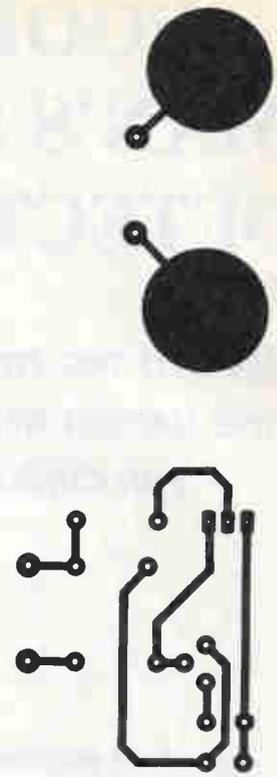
Foil Pattern of PC Boards. Note that this is a double-sided board.
